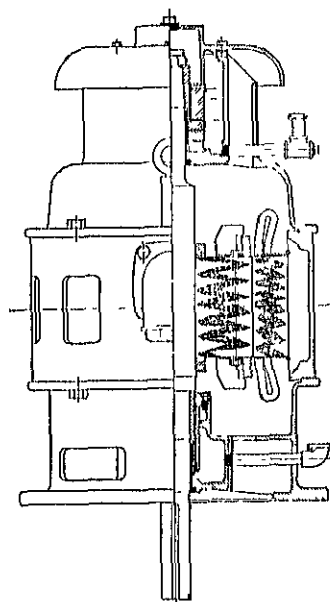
Cross-section of vertical squirrel-cage motor.
